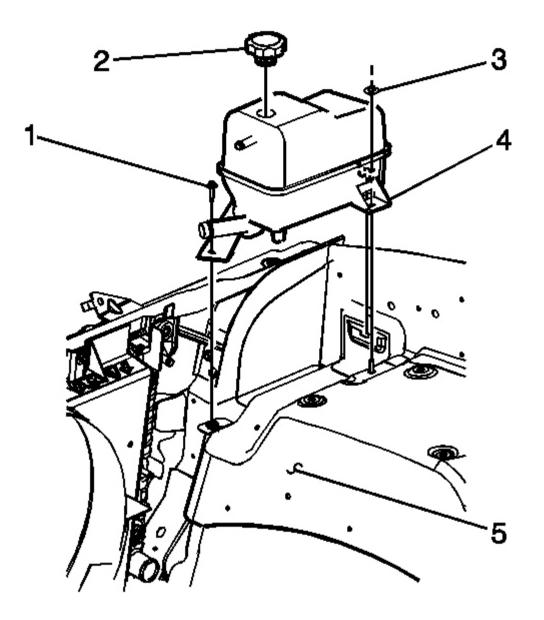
Identifying Surge Tank Courtesy of GENERAL MOTORS CORP.
